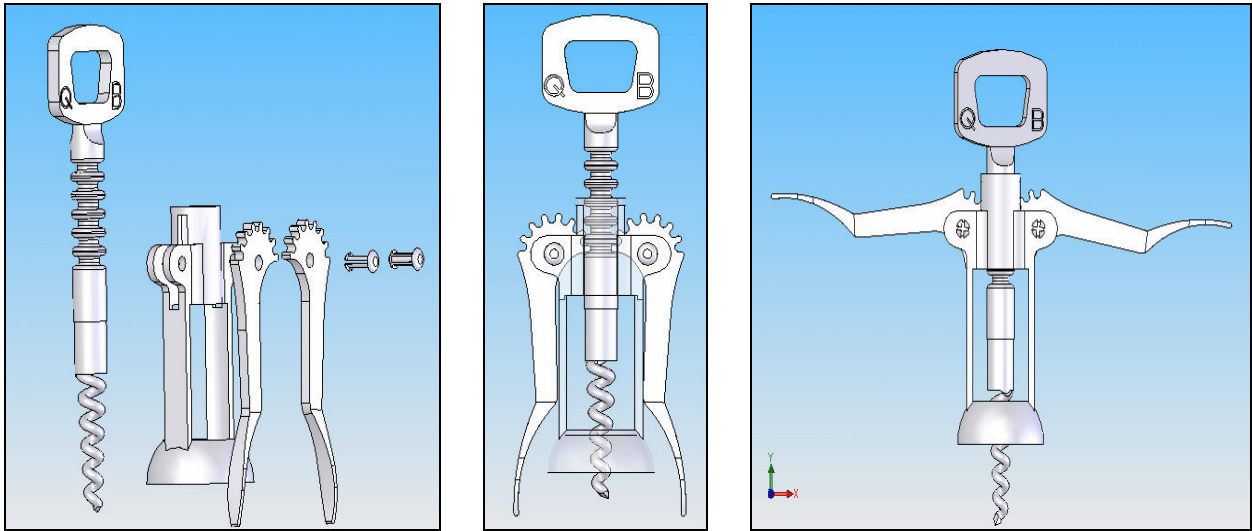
The exploded, assembly, and prototype models of the Corkscrew.
